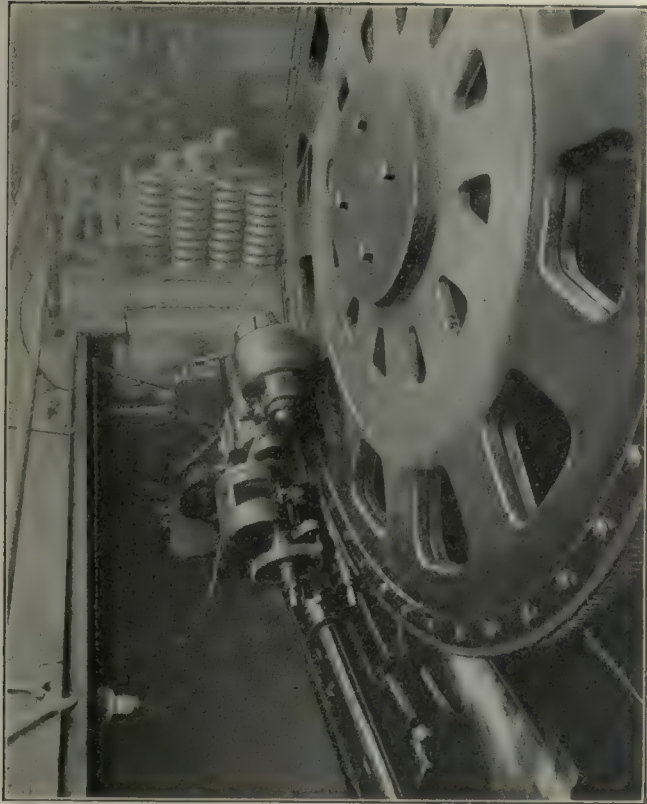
INDEX WHEEL AND INDEXING MECHANISM
